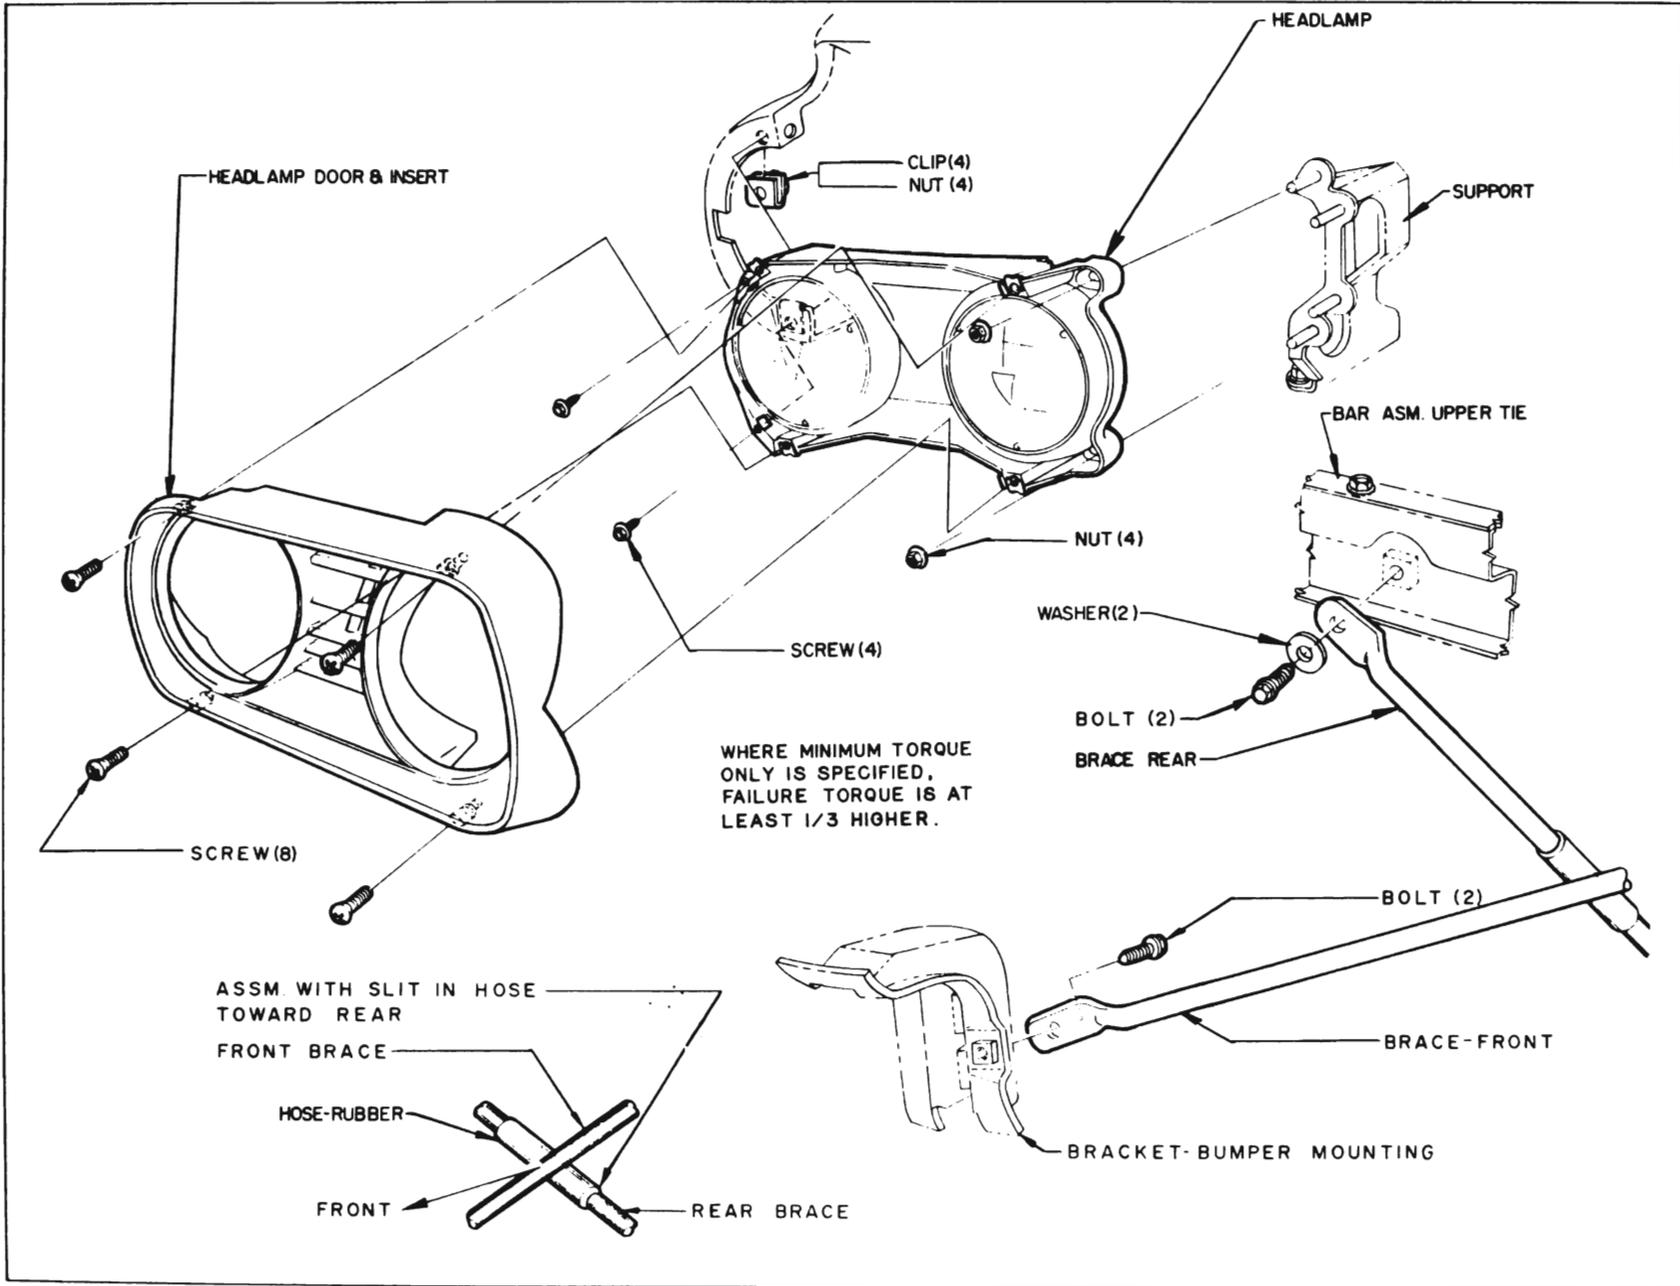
Headlight Installation—4400-4600-4800 Series
